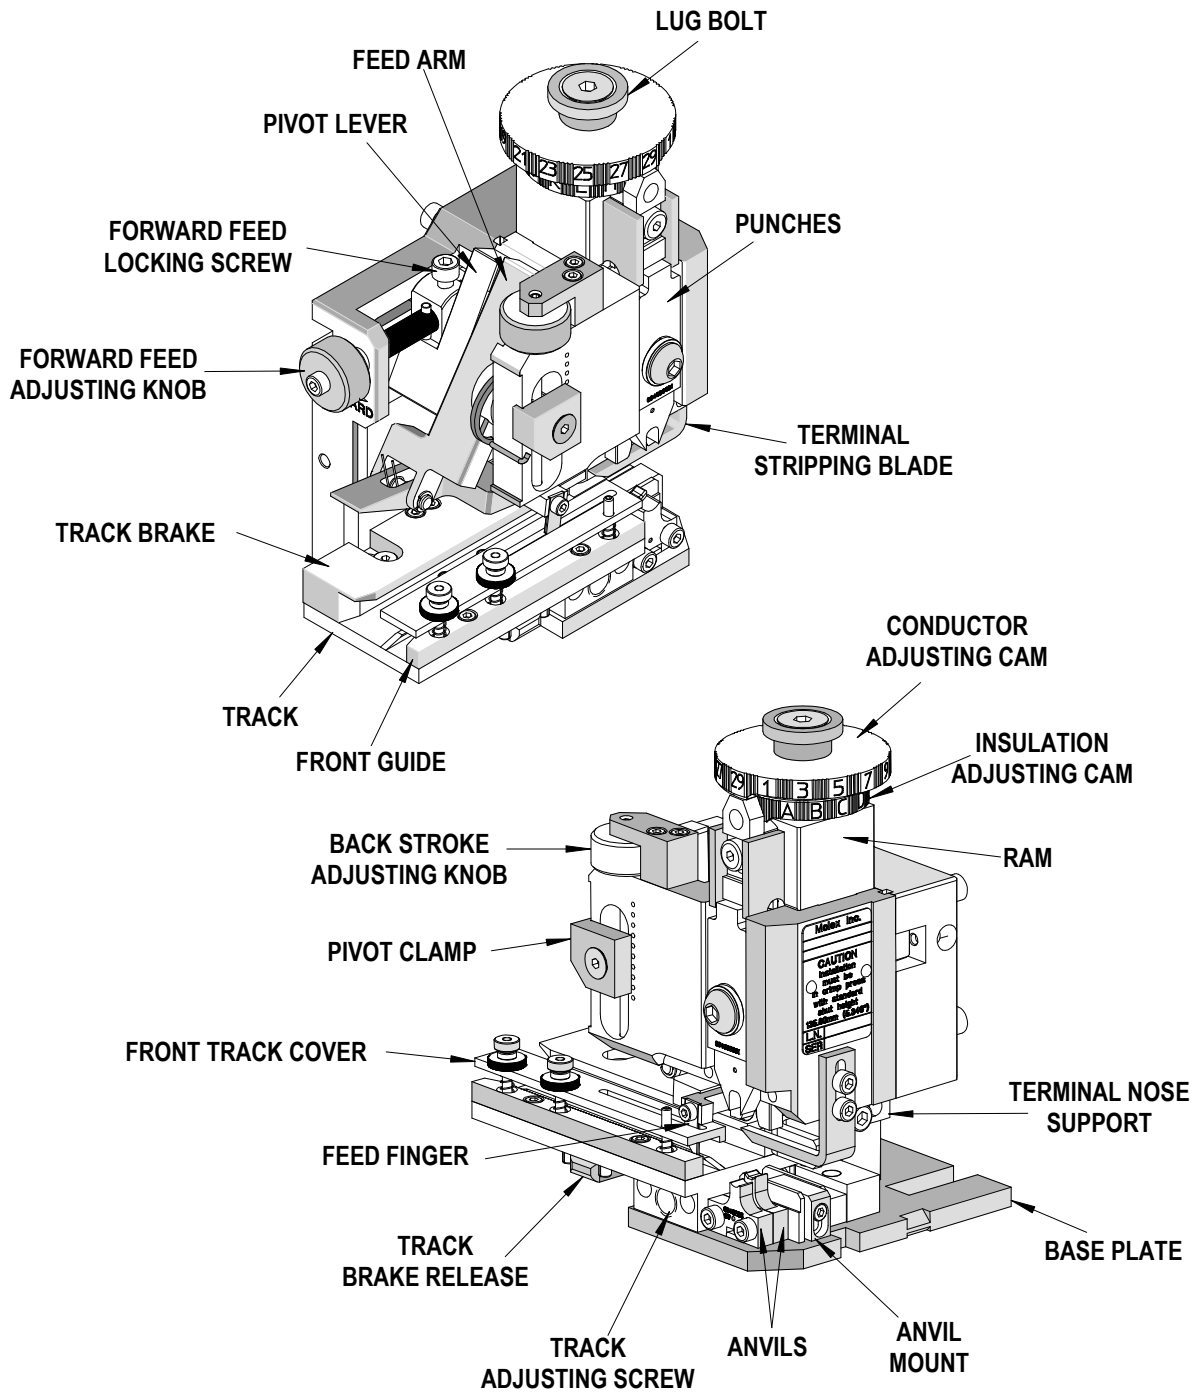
MECHANICAL FEED MOLDED STRIP APPLICATOR
